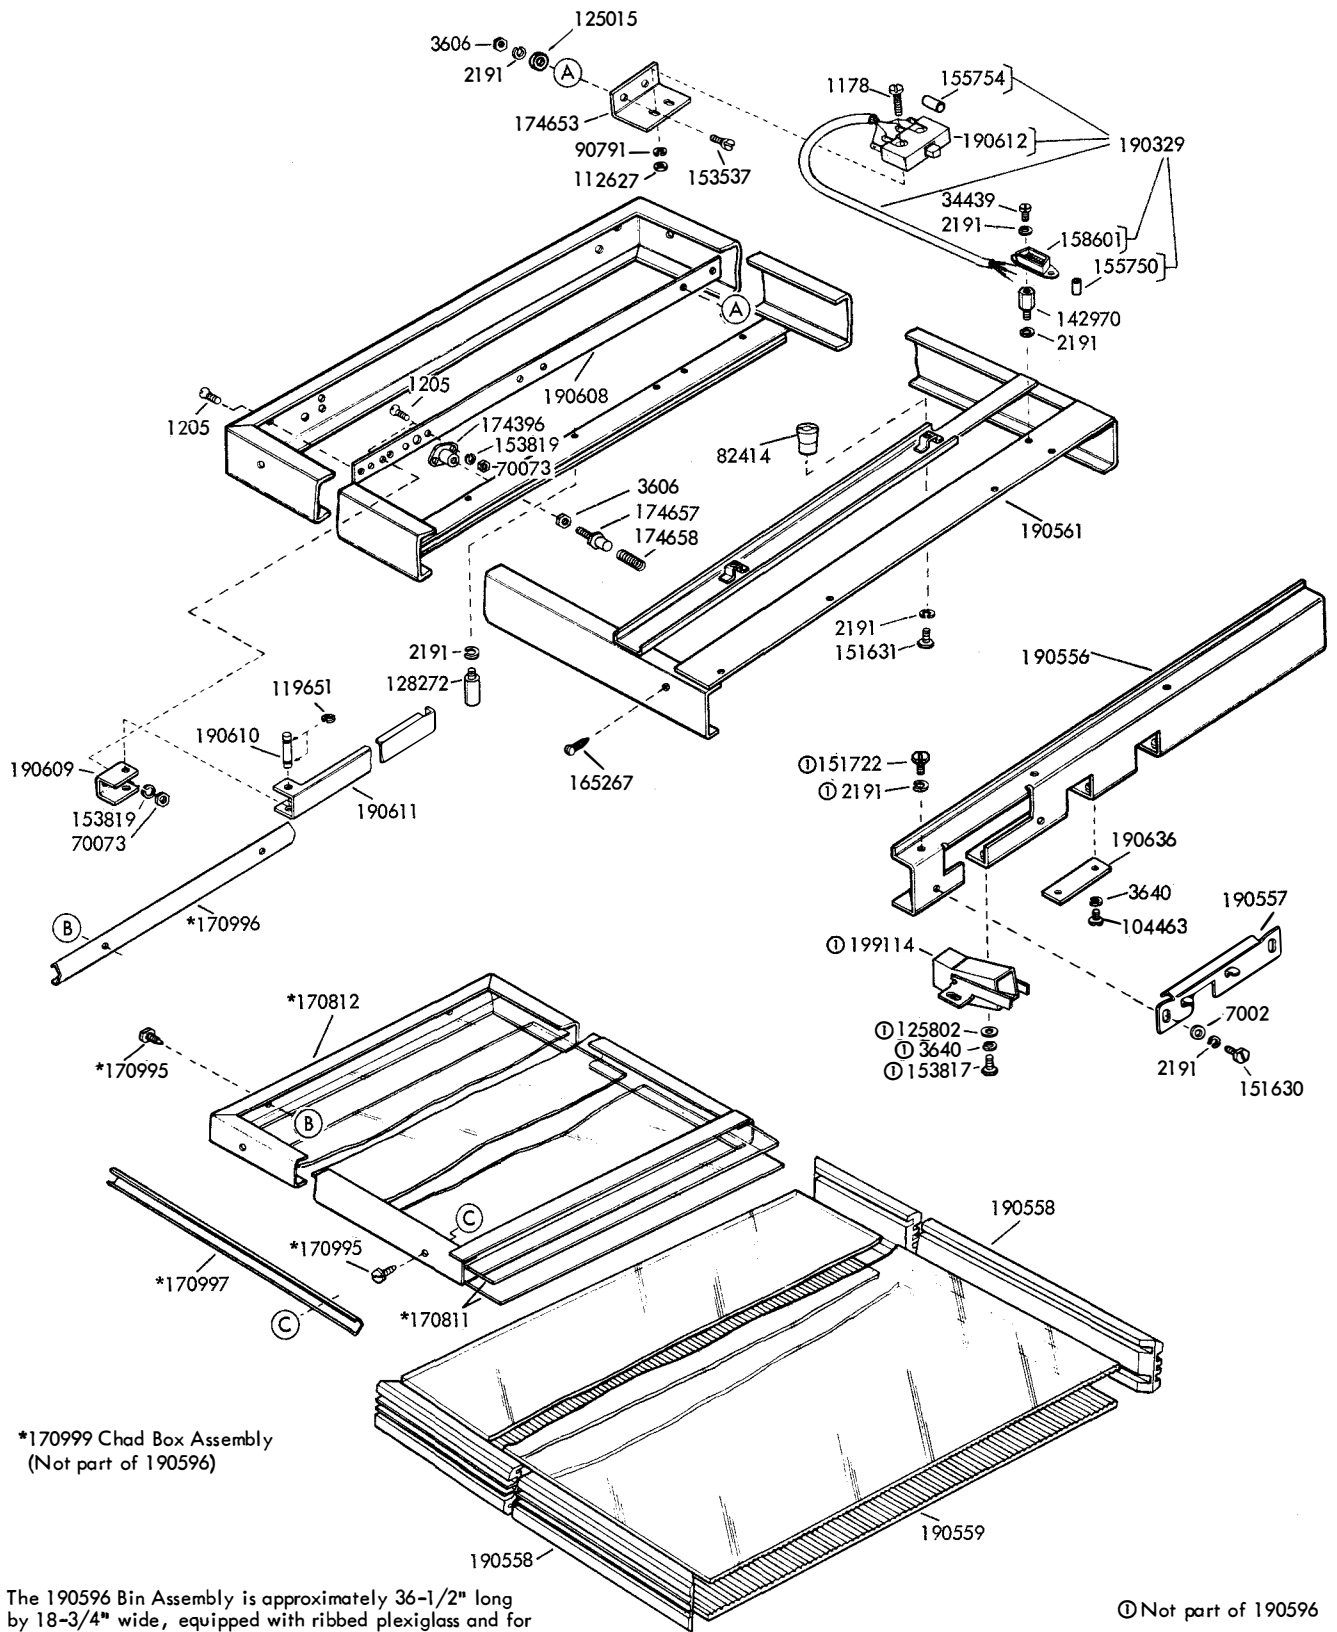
190596 TAPE STORAGE BIN ASSEMBLY
